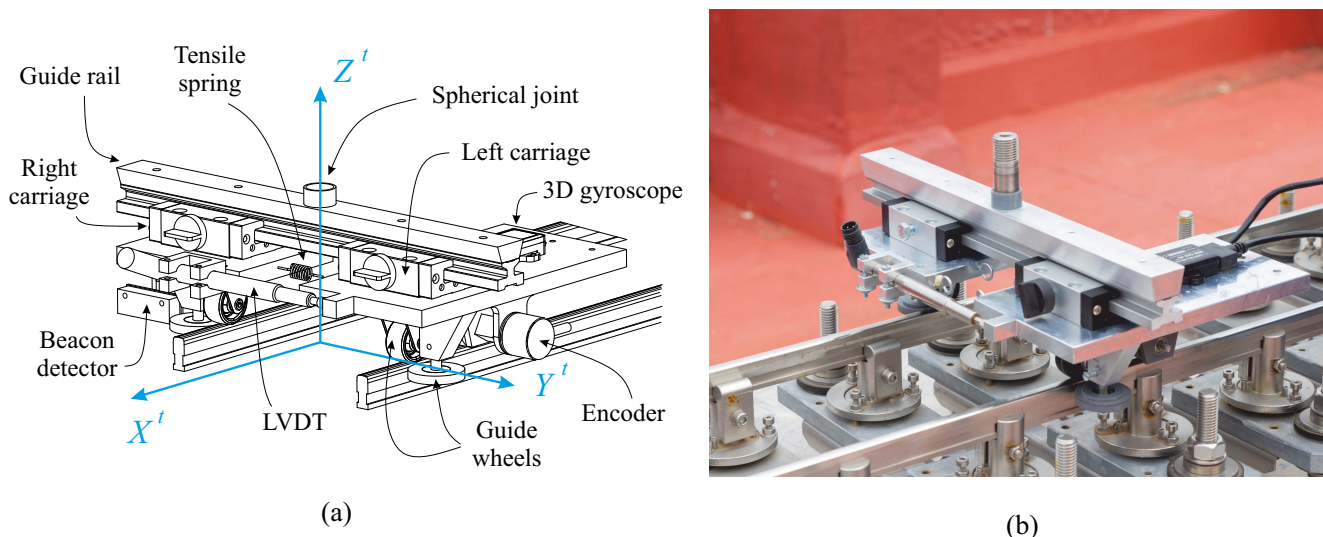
Instrumented axle: (a) CAD design, (b) real prototype
